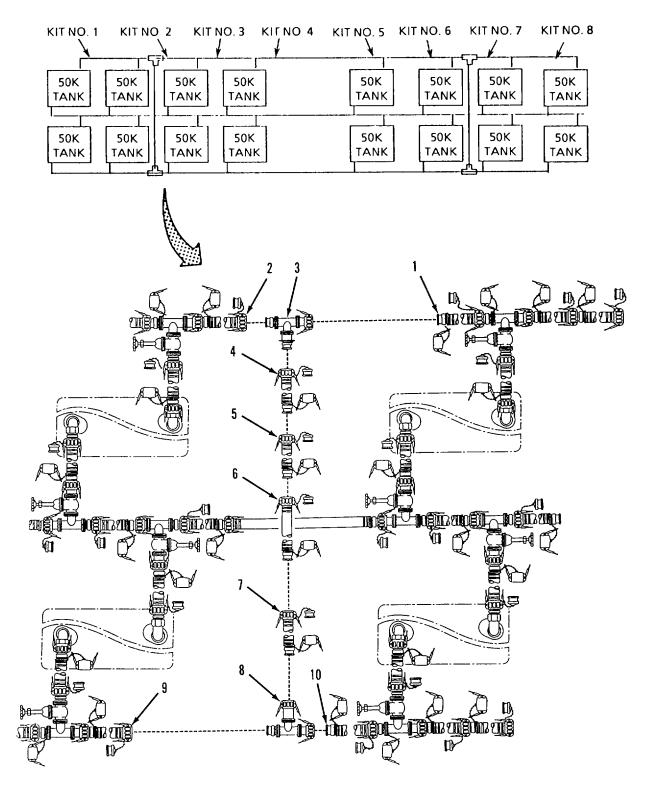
Interconnection Kit Assembly (Sheet I of 2).
